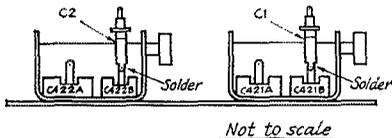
C_1 is soldered to the stator of C_{421B} and C_2 is soldered to the stator of C_{422B} so that the mounting flange of each trimmer clears the end supports of the variables and is the same height above the chassis.
